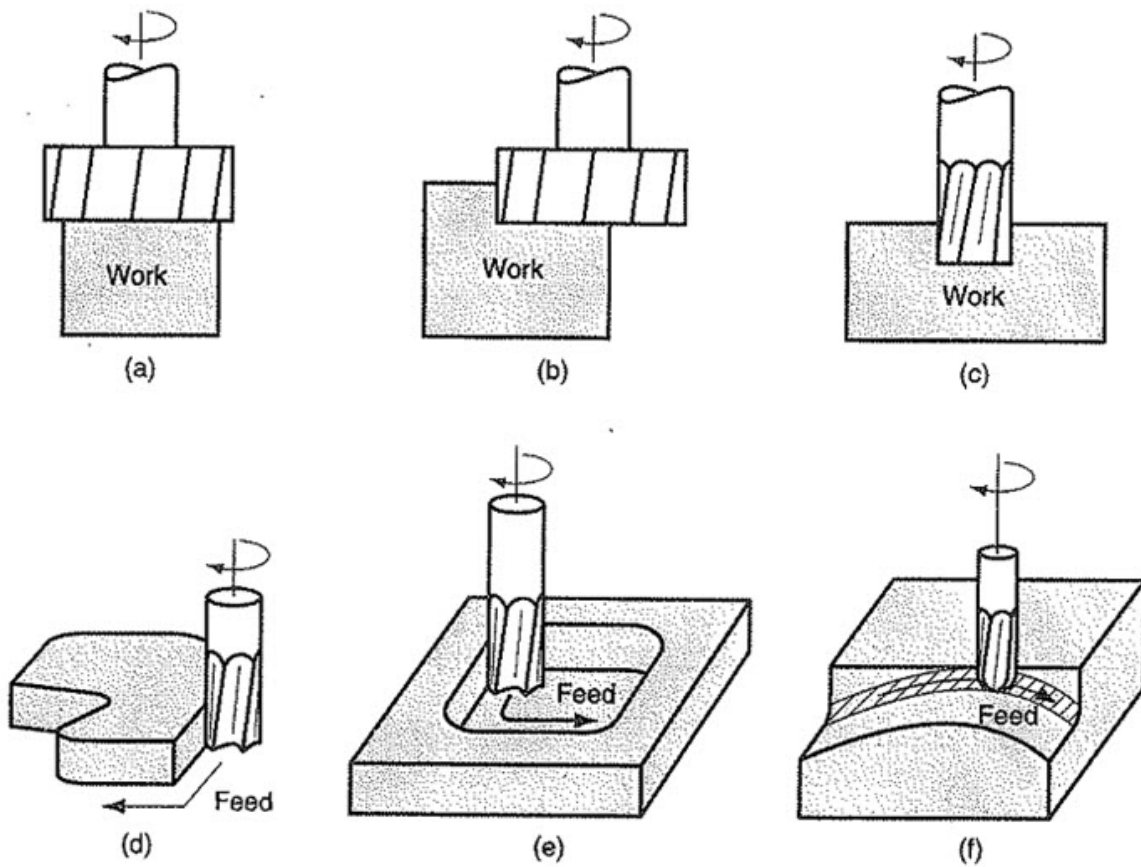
Face milling: (a) conventional face milling, (b) partial face milling, (c) end milling, (d) profile milling, (e) pocket milling, and (f) surface contouring.
